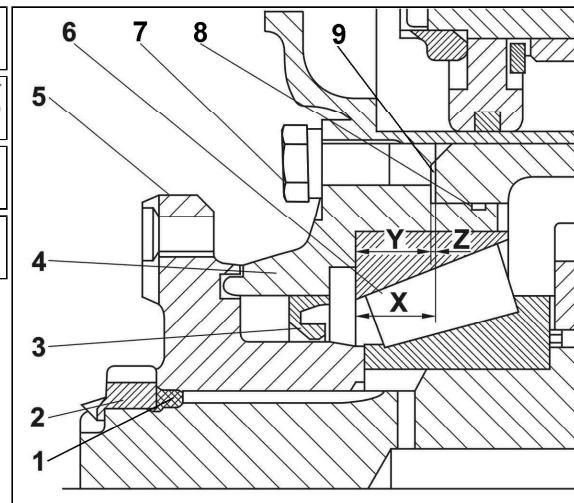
Replacement of the gearbox input shaft carrier seal
